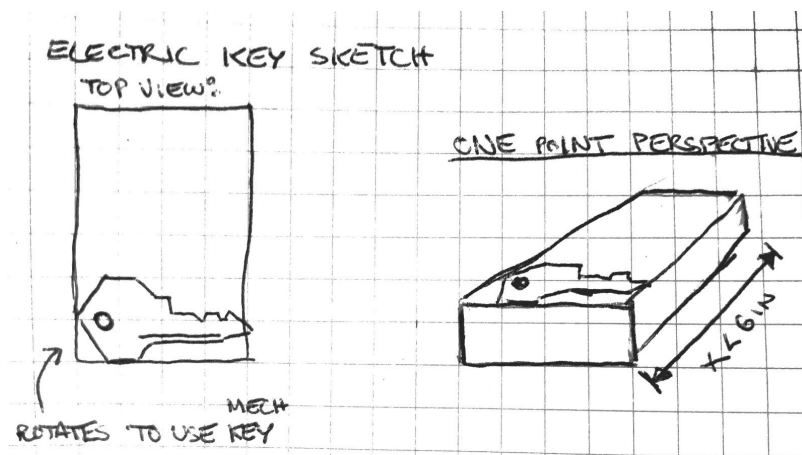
Sketch of electronic key enclosure. This device stores the keys electronic components and has the mechanical key attached on top for easy access.
